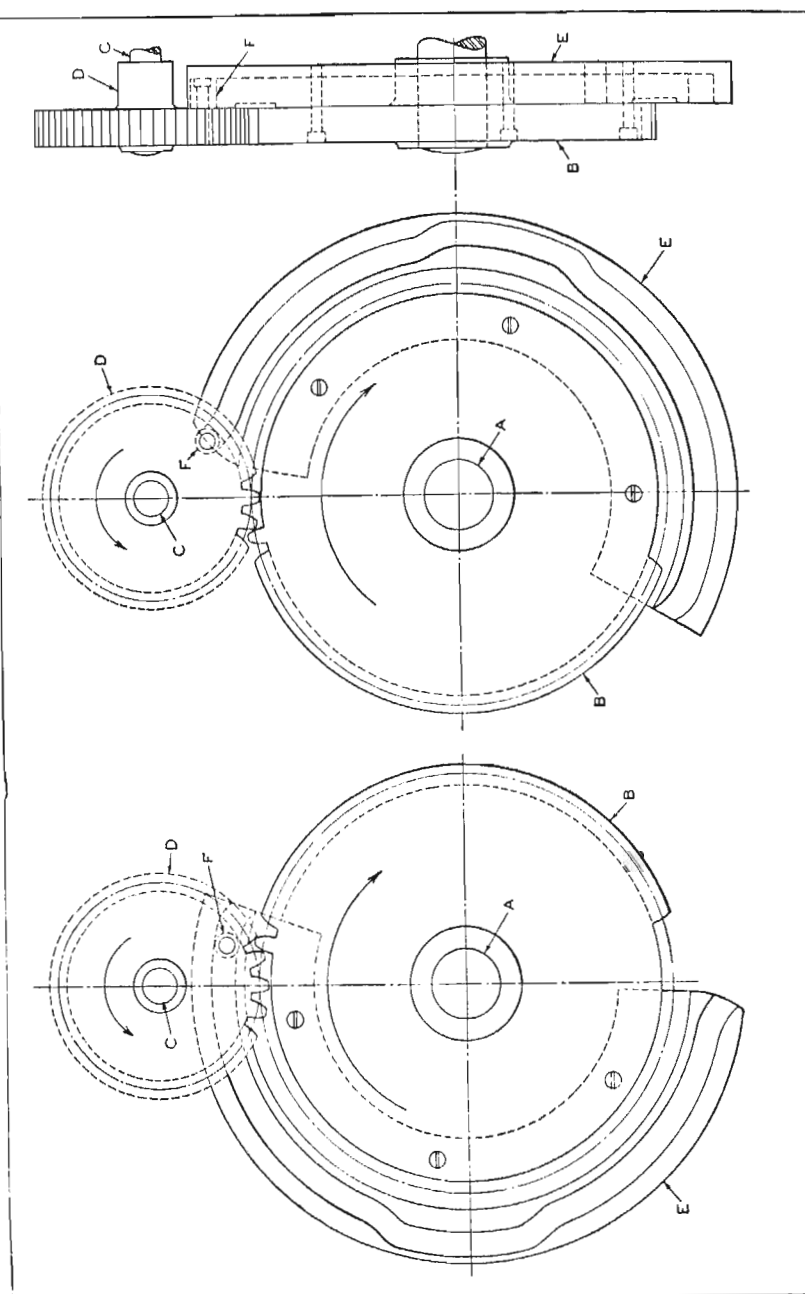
(Left) Irregular, Intermittent, Rotary-motion Mechanism with Driven Gear D about to Begin Dwell; (Center) Driven Gear D about to Begin Rotation; (Right) End View of Mechanism.
